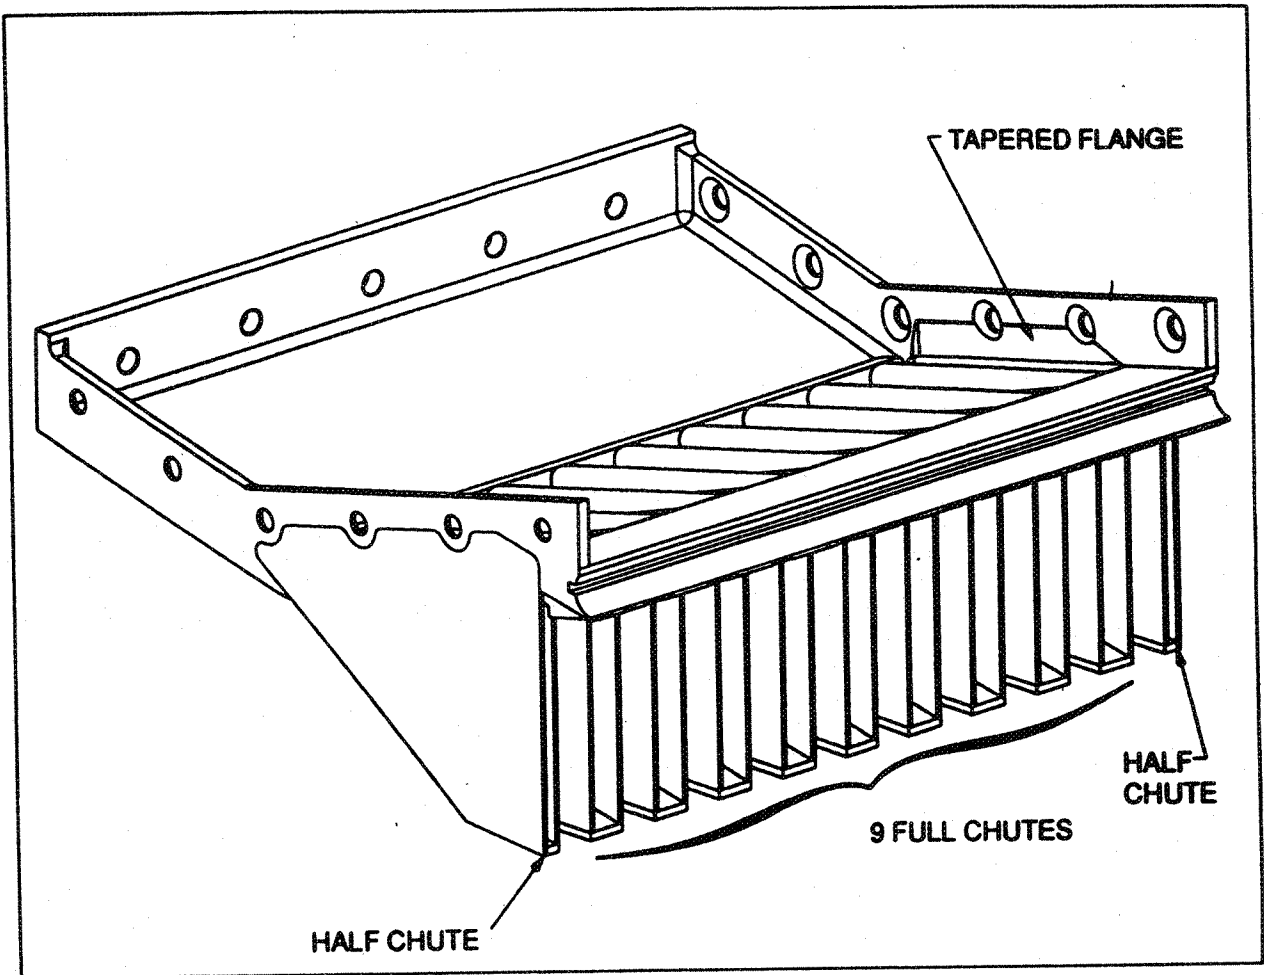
Isometric view and the details of SAR=2.8 nine and two halves CD-chute rack design for staggered mixer assembly (all dimensions are in inches).
